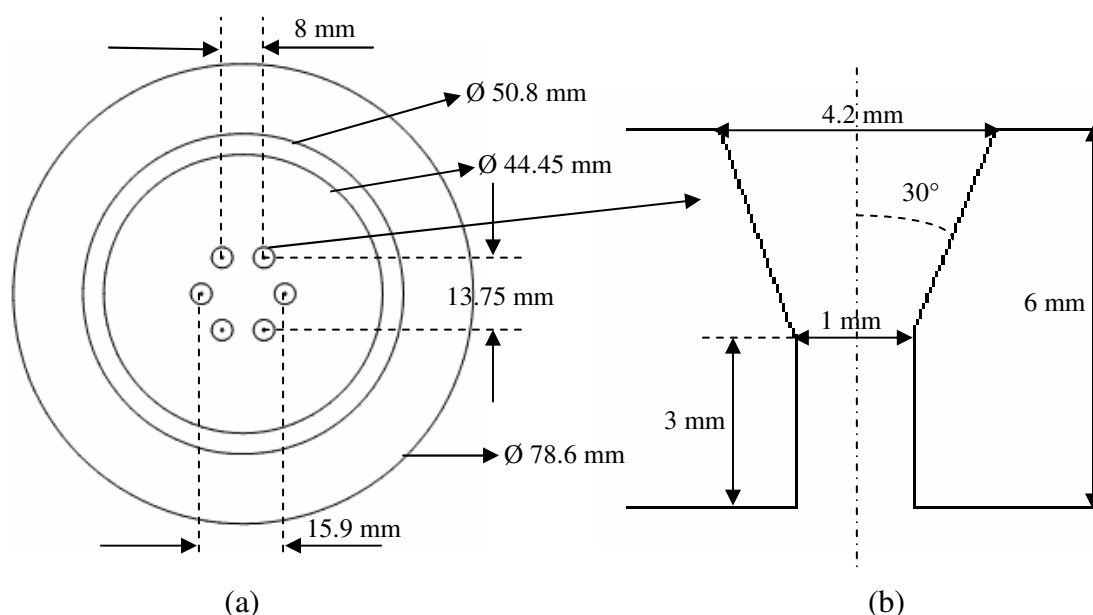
(a) Six hole spinneret and its dimensions, (b) Dimensions of a single hole
